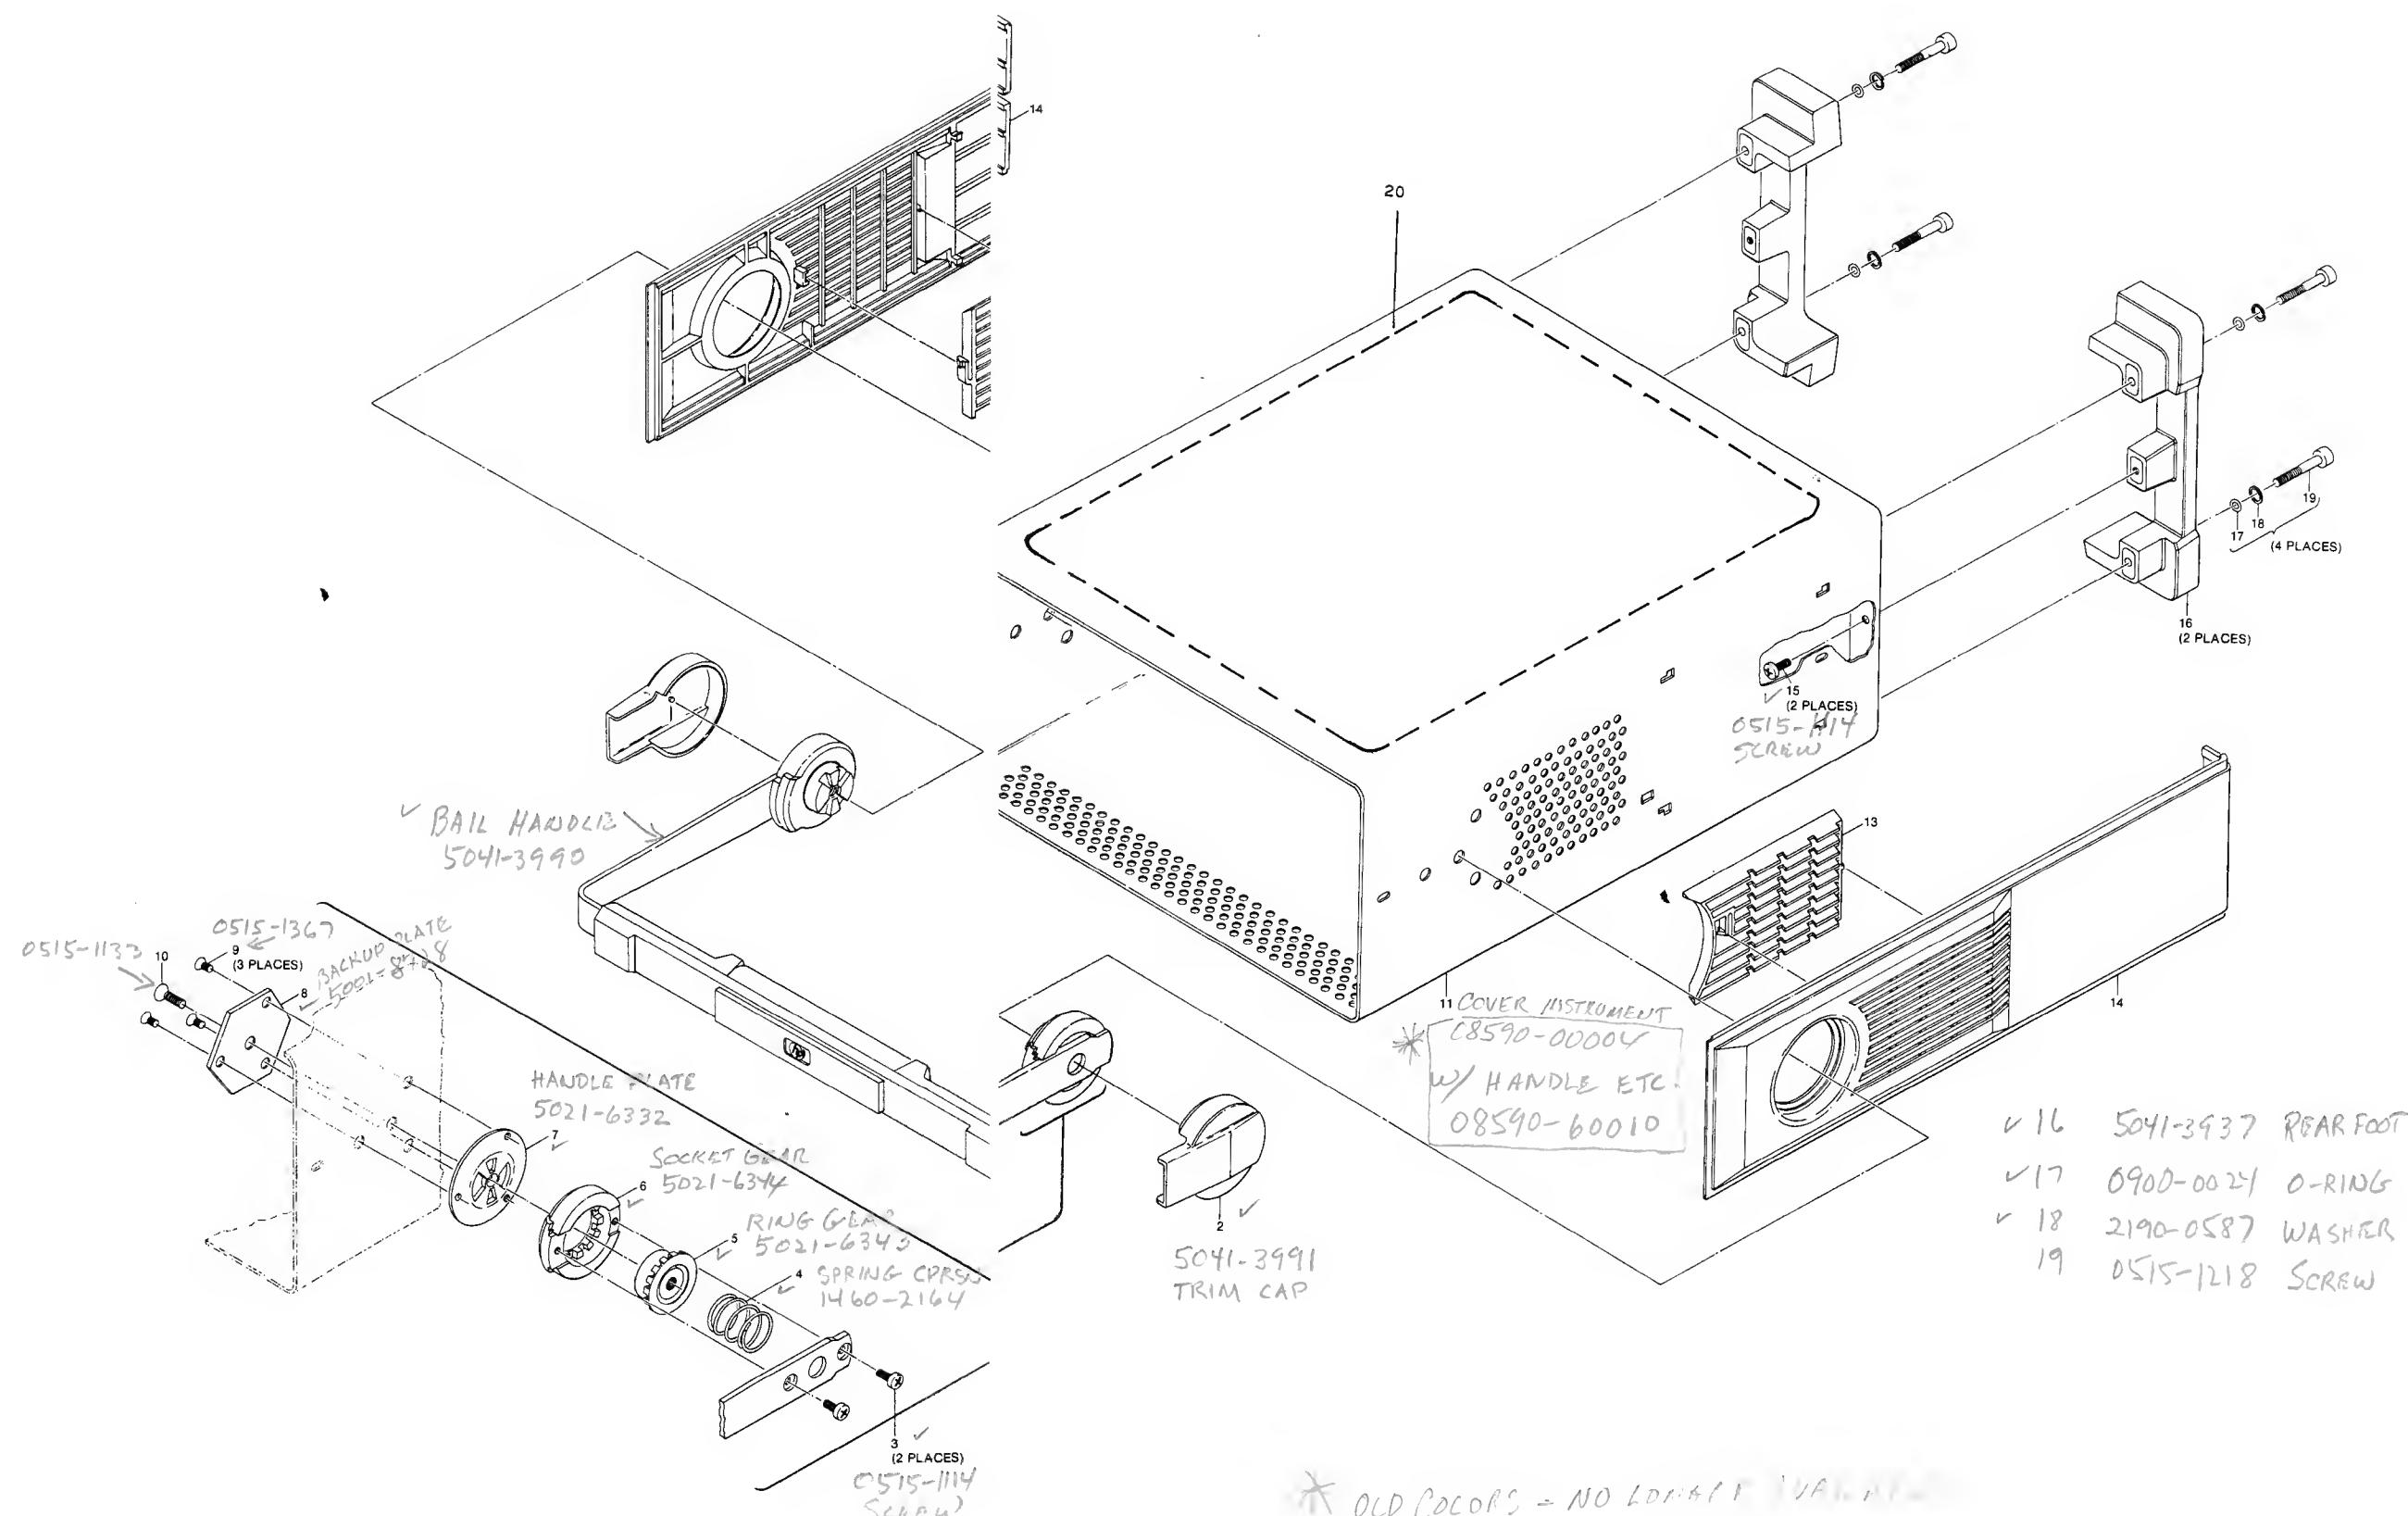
Instrument Cover Assembly Mechanical Parts 2-23
